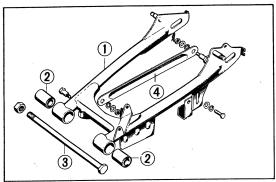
① Rear fork ② Rear fork pivot rubber bush ③ Rear fork pivot bolt ④ Rear brake stopper arm
